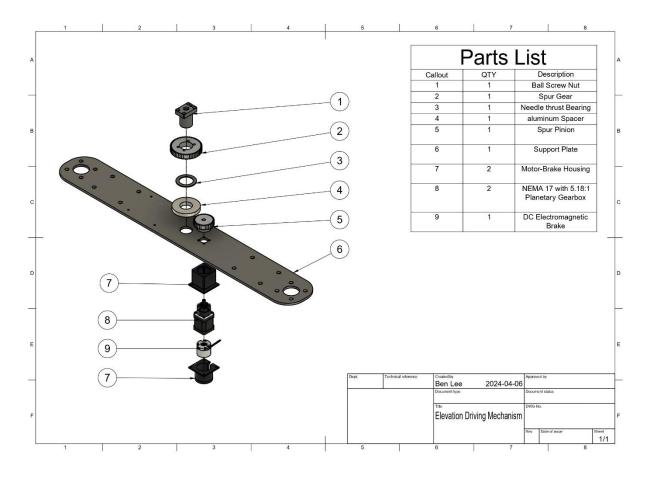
Elevation Driving Mechanism Assembly Exploded View
